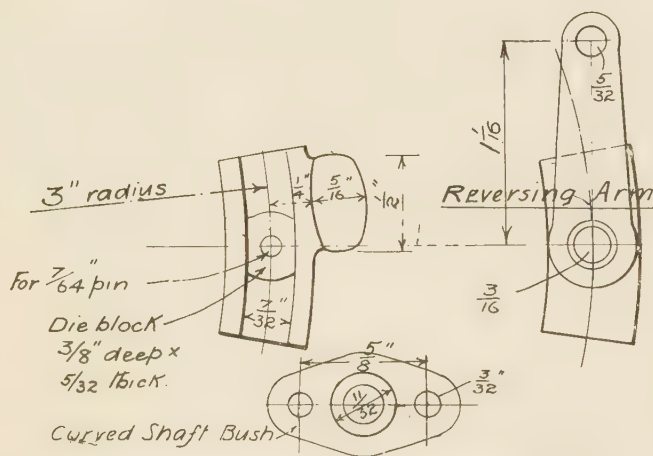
WEIGH SHAFT AND CURVED SLIDES.
